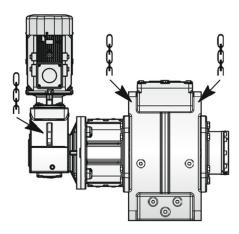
e: Position of additional lifting points for auxiliary drive reducers of type HB / H
